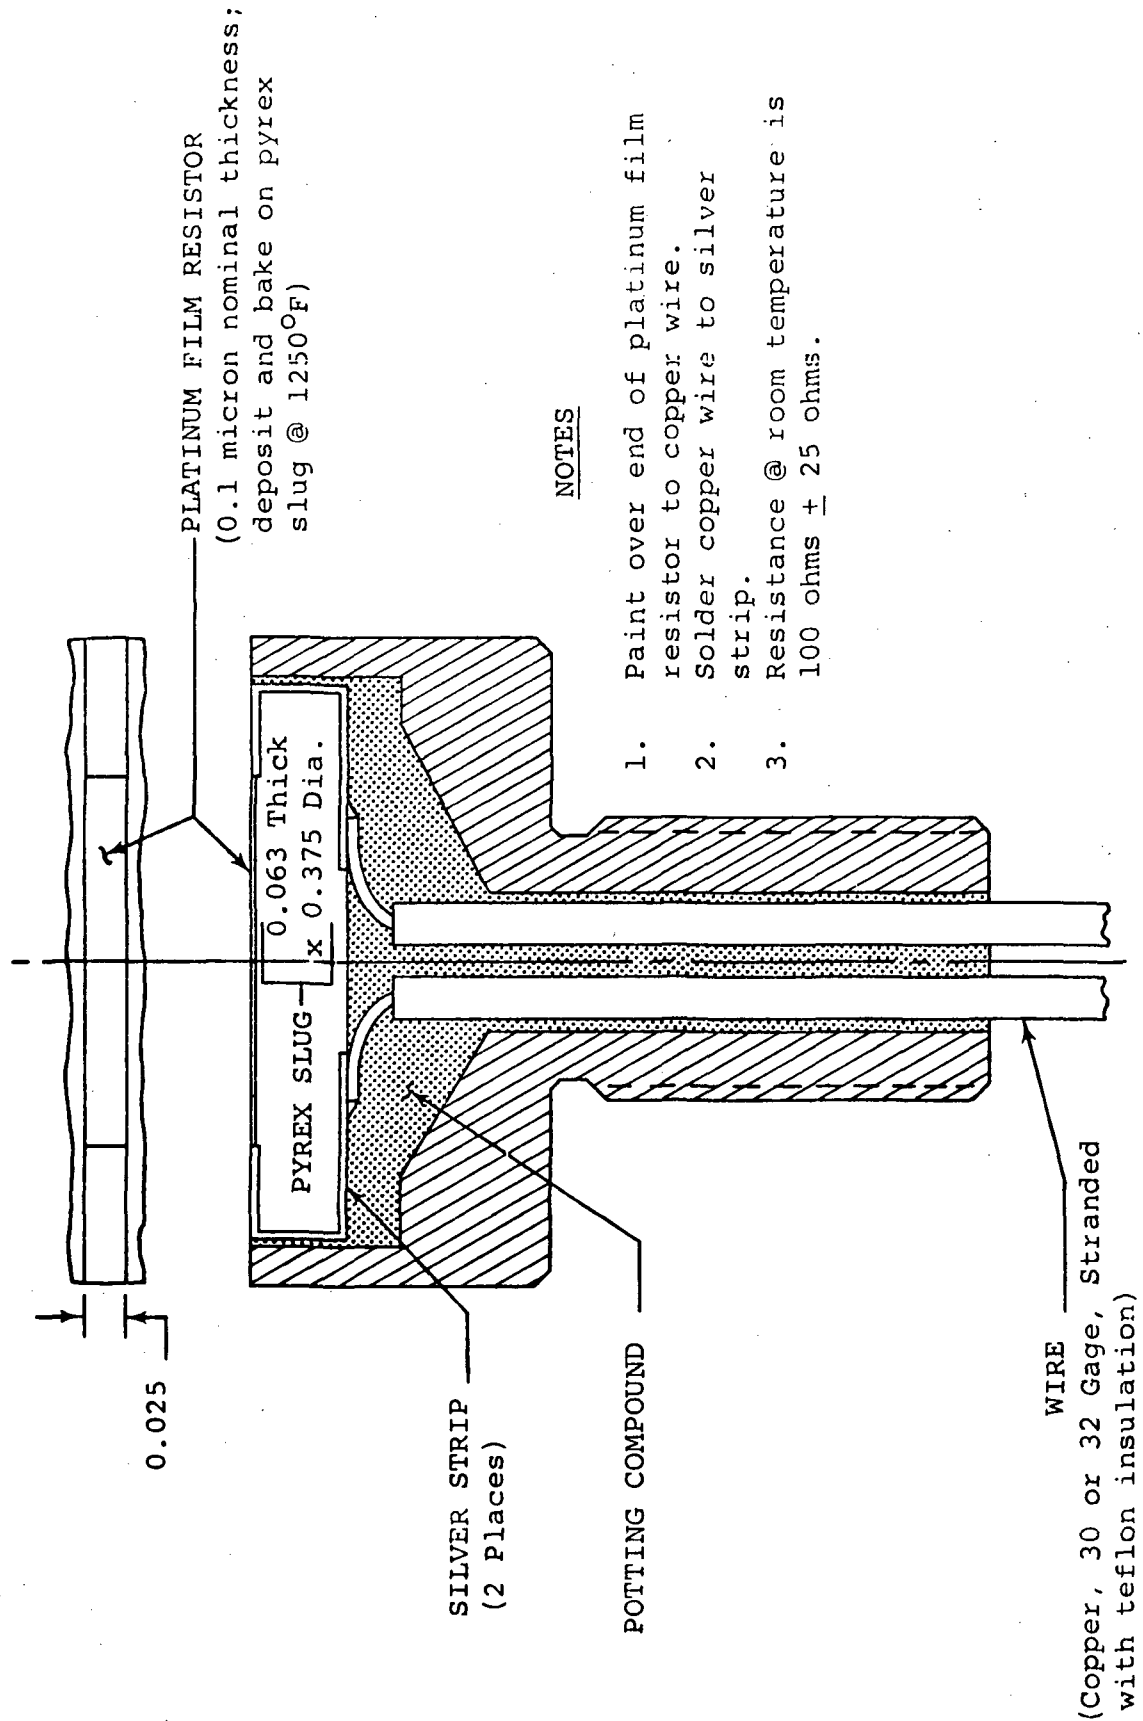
Cross Sectional View of Heat Transfer Gage
